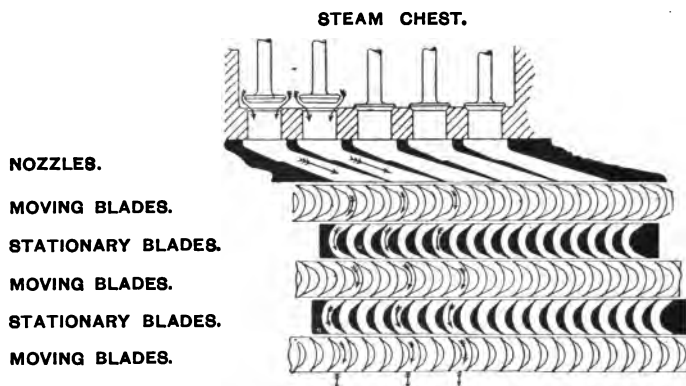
Nozzles and Blades of Curtis Steam Turbine.
